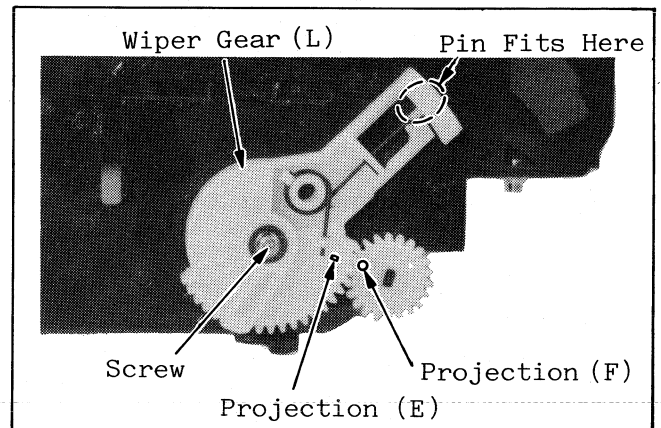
Adjustment of Cassette Up Gears-(9)
